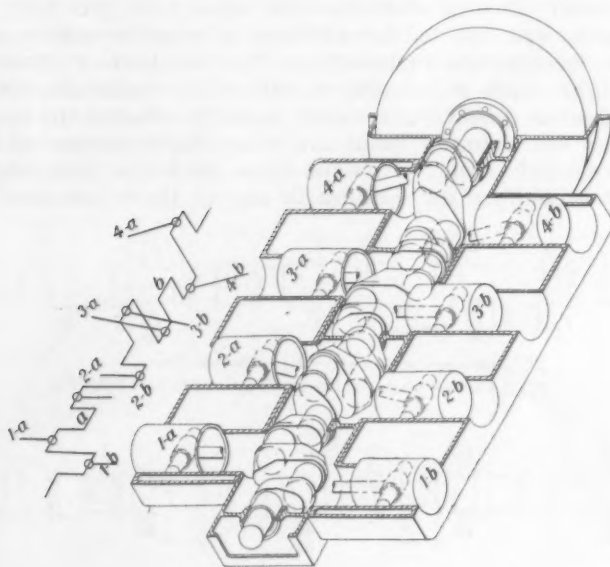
COMPLETE VIEW OF THE EIGHT-CYLINDER-OPPOSED ENGINE, THE CRANKSHAFT OF WHICH IS ILLUSTRATED IN THE BOTTOM VIEW OF FIG. 20
